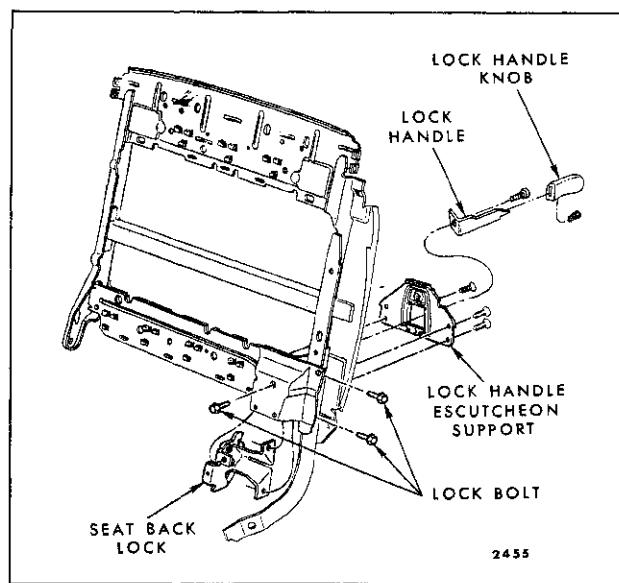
Front Seat Back Lock - "A, B & X"
